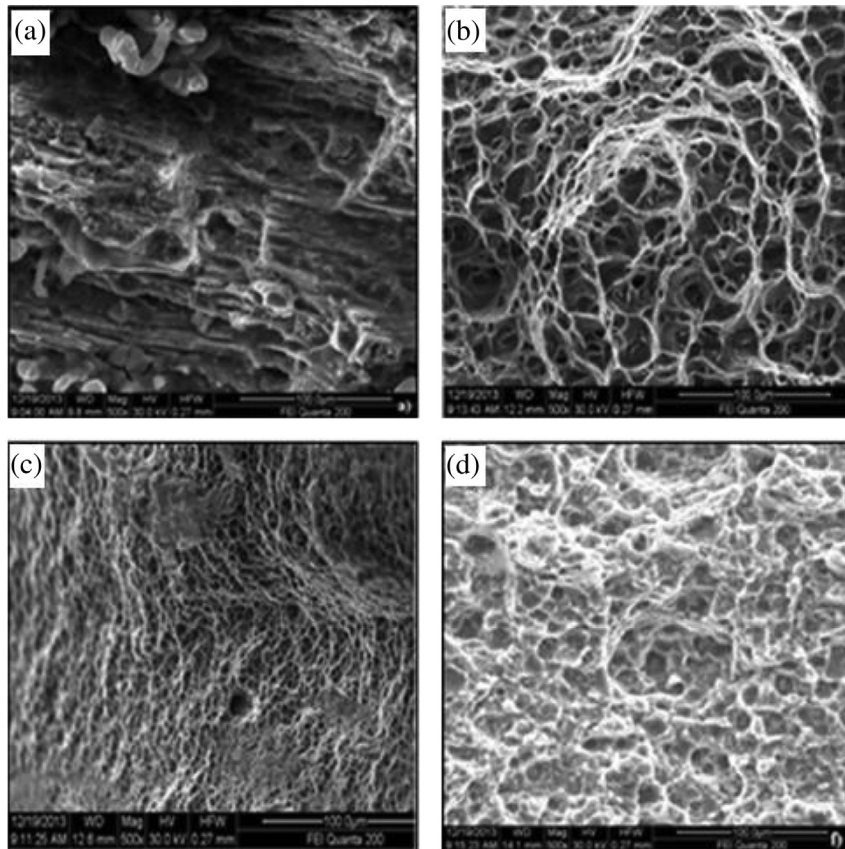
SEM Fractographs of fractured tensile samples of welds in various temper conditions. (a) Base, (b) As-welded, (c) T6, (d) RRA.
